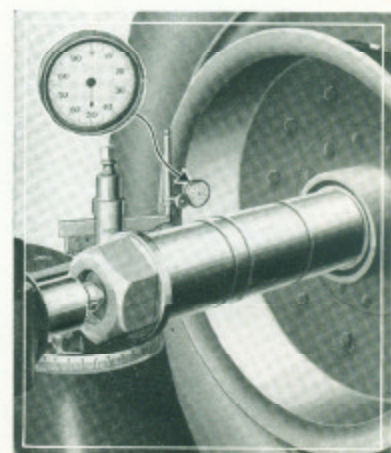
Testing the brake drum with a dial test indicator. The wheel is mounted on a self-centering mandrel and mounted between centers on the lathe. The indicator will show an error of a thousandth of an inch.
